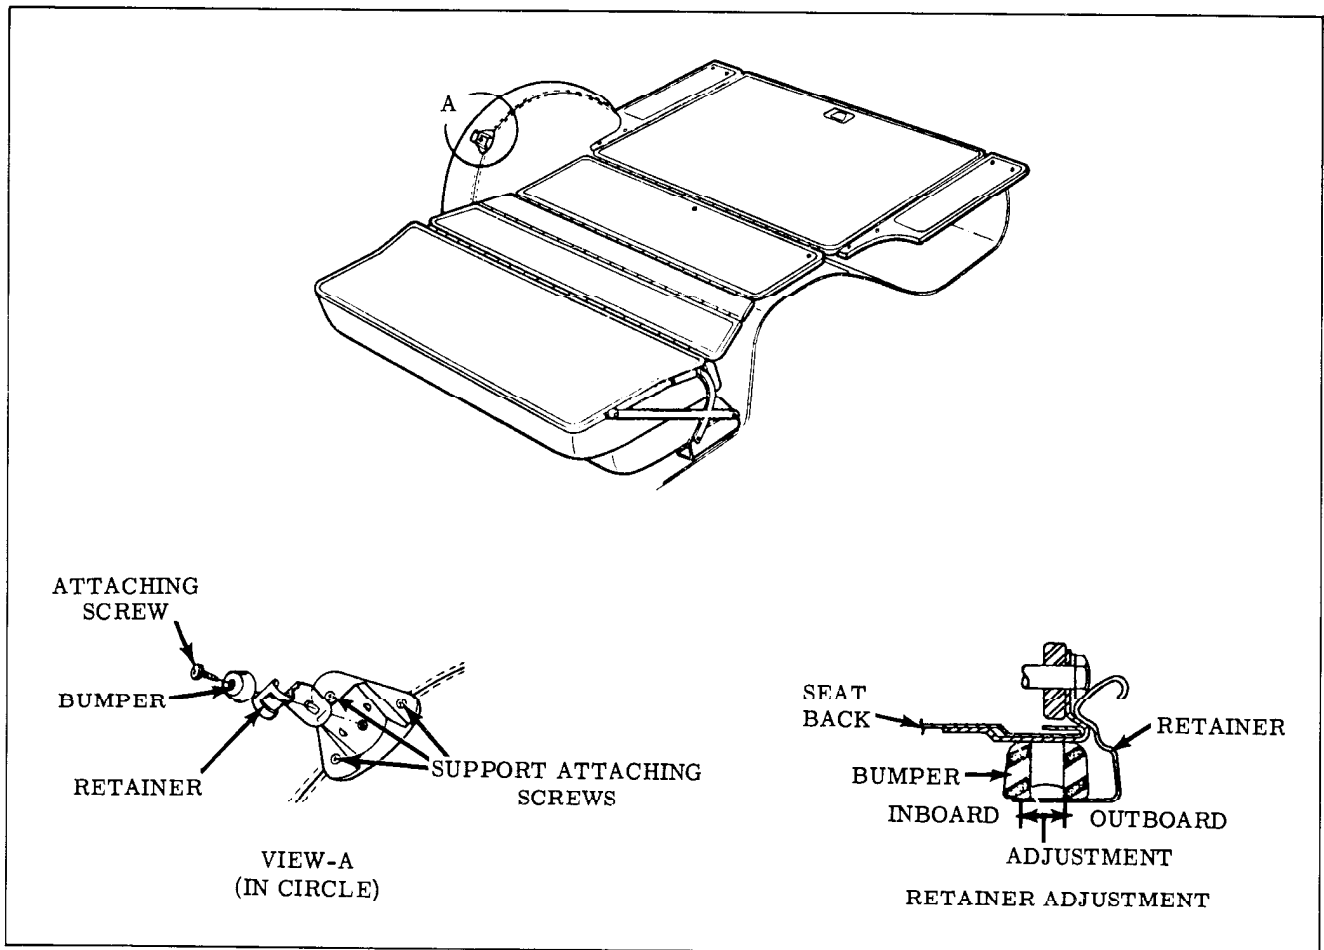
Folding Rear Seat Back Bumper, Retainer & Support
